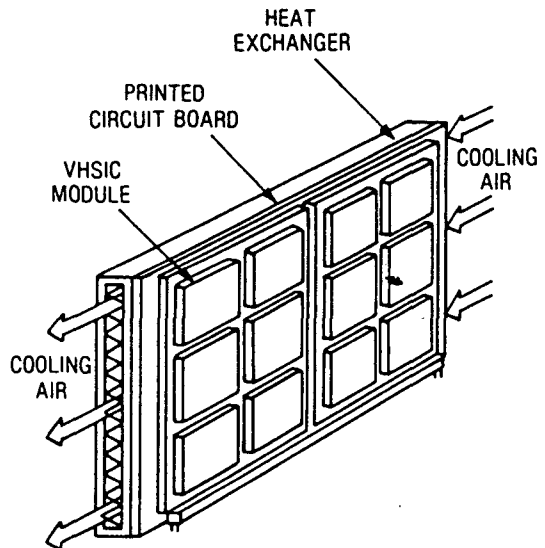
HOLLOW CORE PCB COOLING WITH HEAT EXCHANGER.
